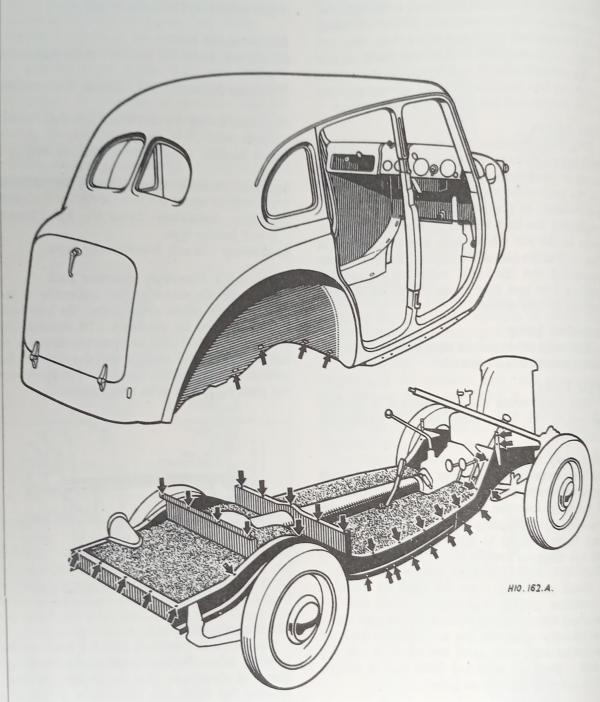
The body attachment points are indicated by the arrows. Setscrews are used throughout to either tapped holes or caged nuts. When refitting, the body sill must be eased over the frame side members with which it forms a box section.
